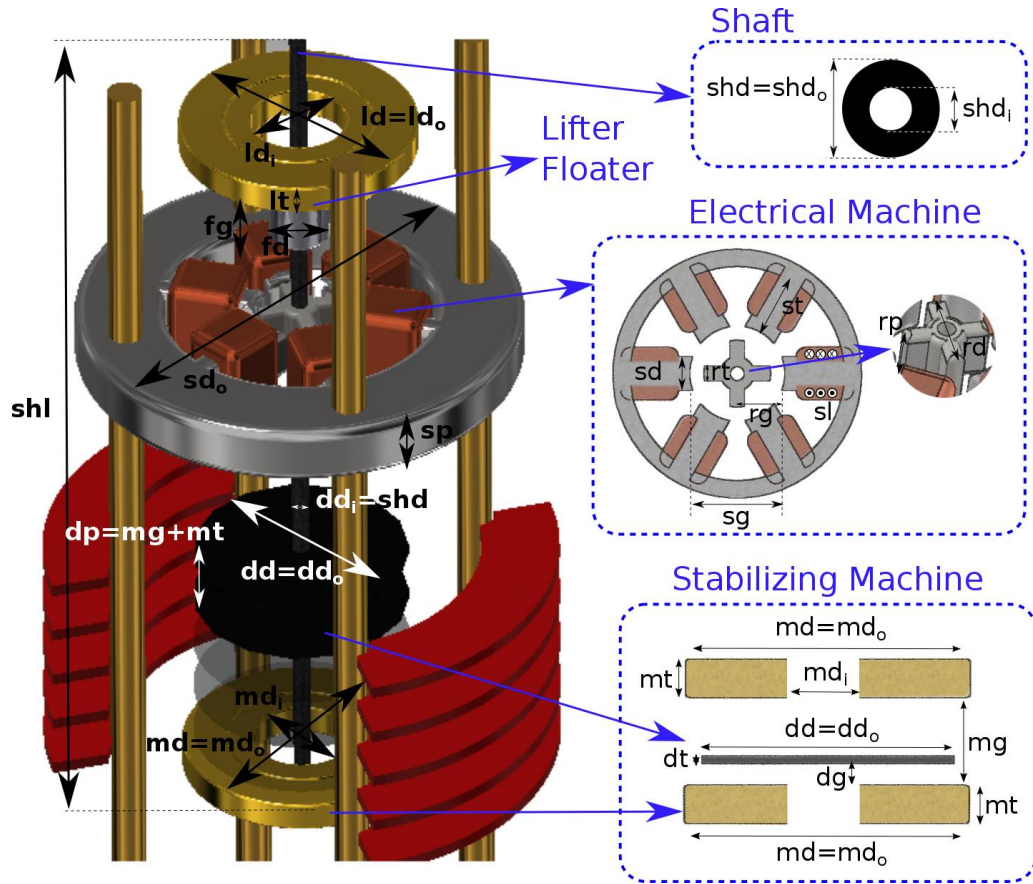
Dimensional parameters for the prototype diamagnetic bearing setup – CAD representation.
